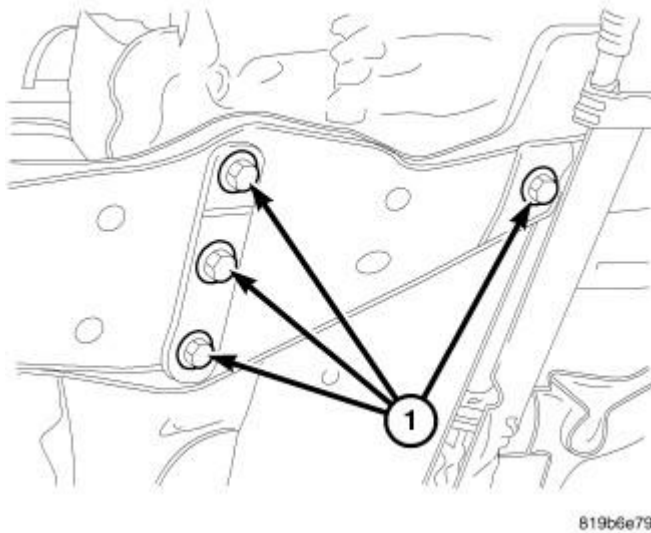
FRONT AFT CROSSMEMBER BOLTS
